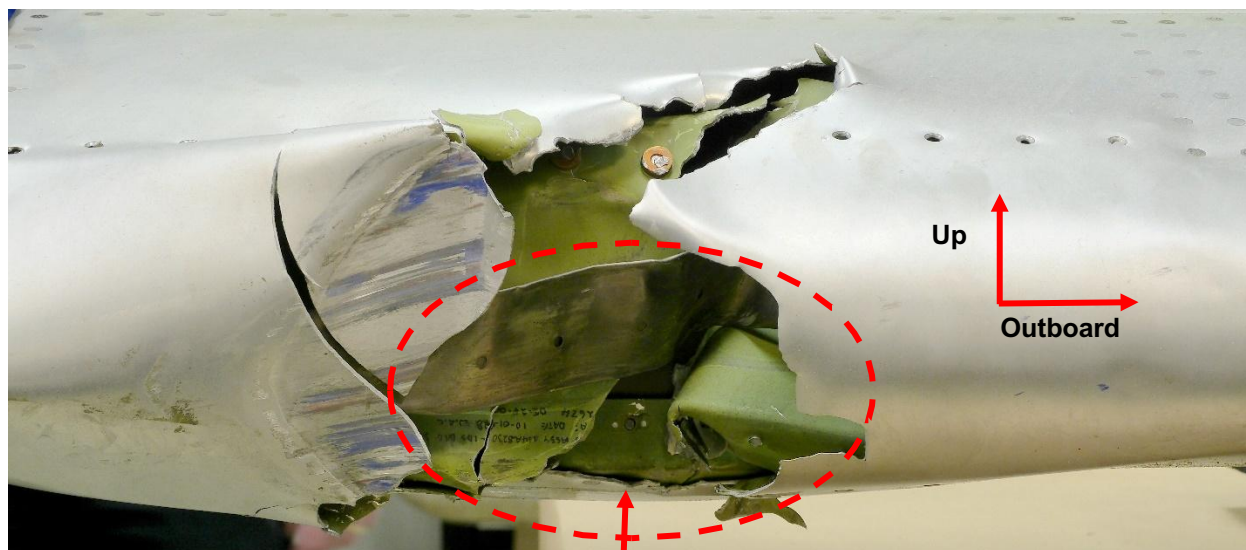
Fracture in slat No. 3 leading edge skin, approximately 101 to 112 inches from the outboard edge
